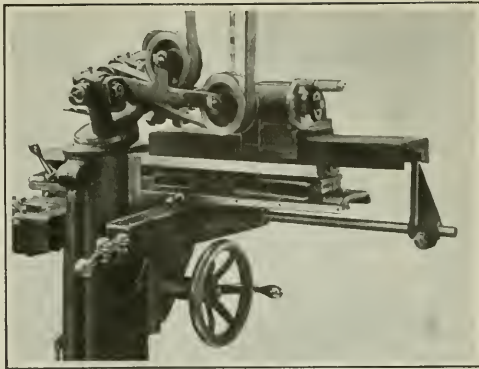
Rear View of Cutter and Hob Grinding Attachment, showing Angular Raising Block
